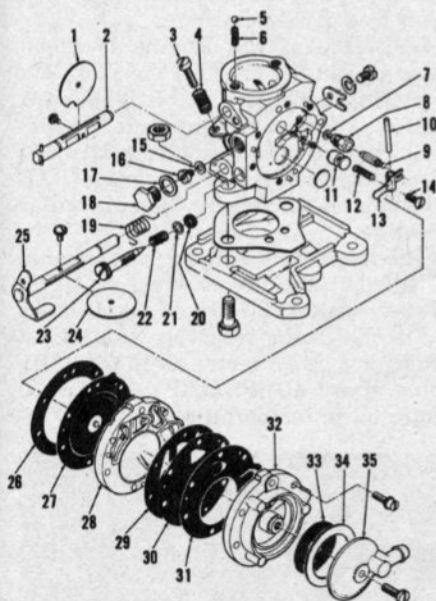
Exploded view of diaphragm type carburetor used in later model engines. Earlier models of carburetor are similar.
